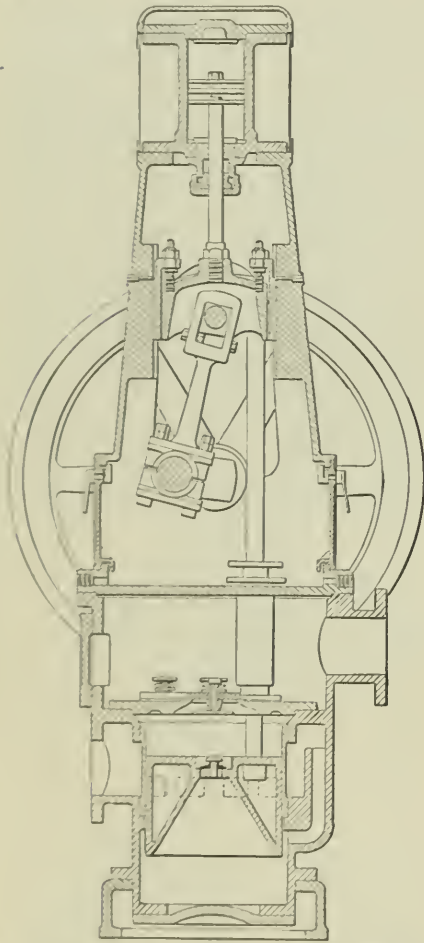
MULLAN'S VERTICAL AIR PUMP
